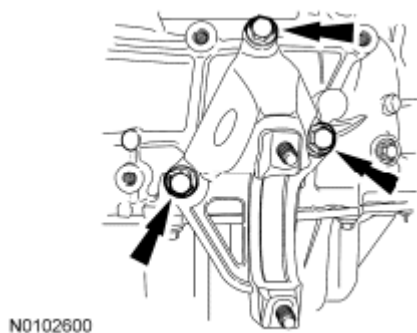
Locating Intermediate Shaft Bracket And Bolts
